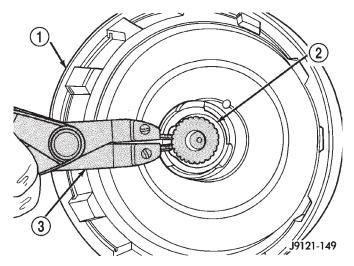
Removing/Installing Input Shaft Snap-Ring
